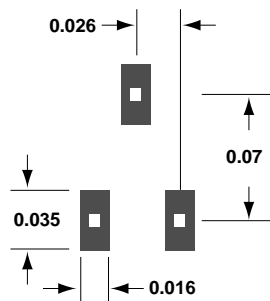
PCB Pad Layout, SOT-323 (dimensions in inches).
